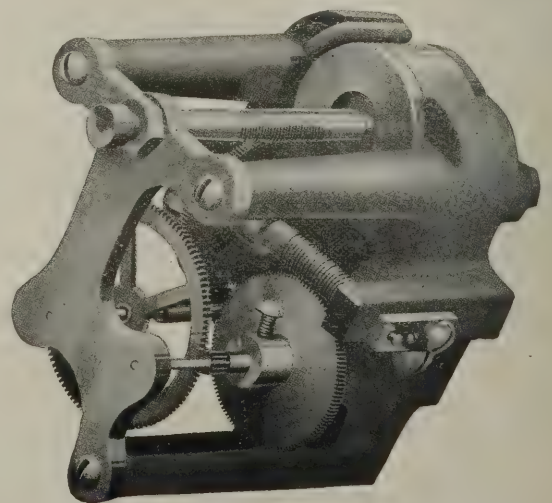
MOTOR ELEMENT OF CONTACT MAKING MOTOR.
